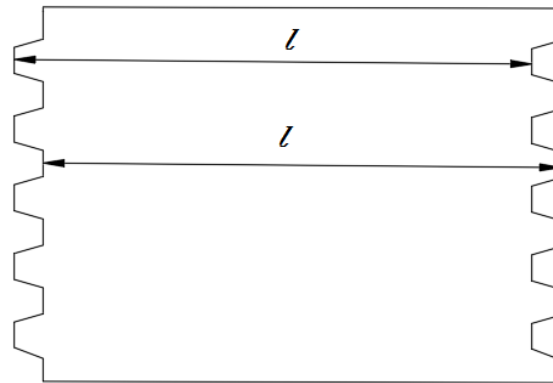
(3) Plan view of typical tanks (corrugated bulkhead)
